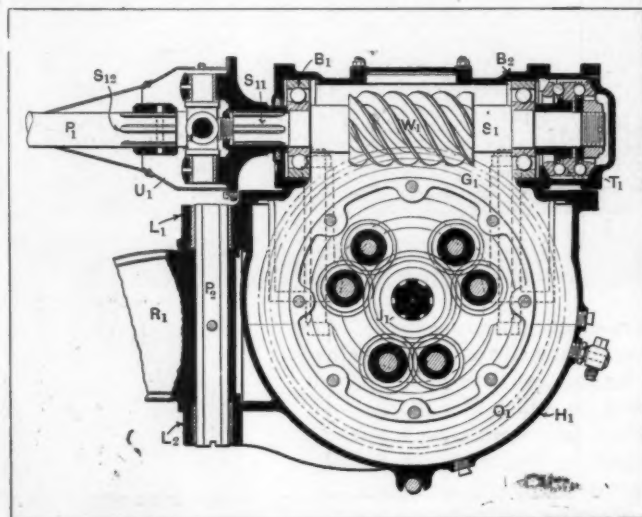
Section of the worm gear drive in the plane of the propeller shaft, showing the worm above the wheel and lubricating oil in the bottom of the housing
